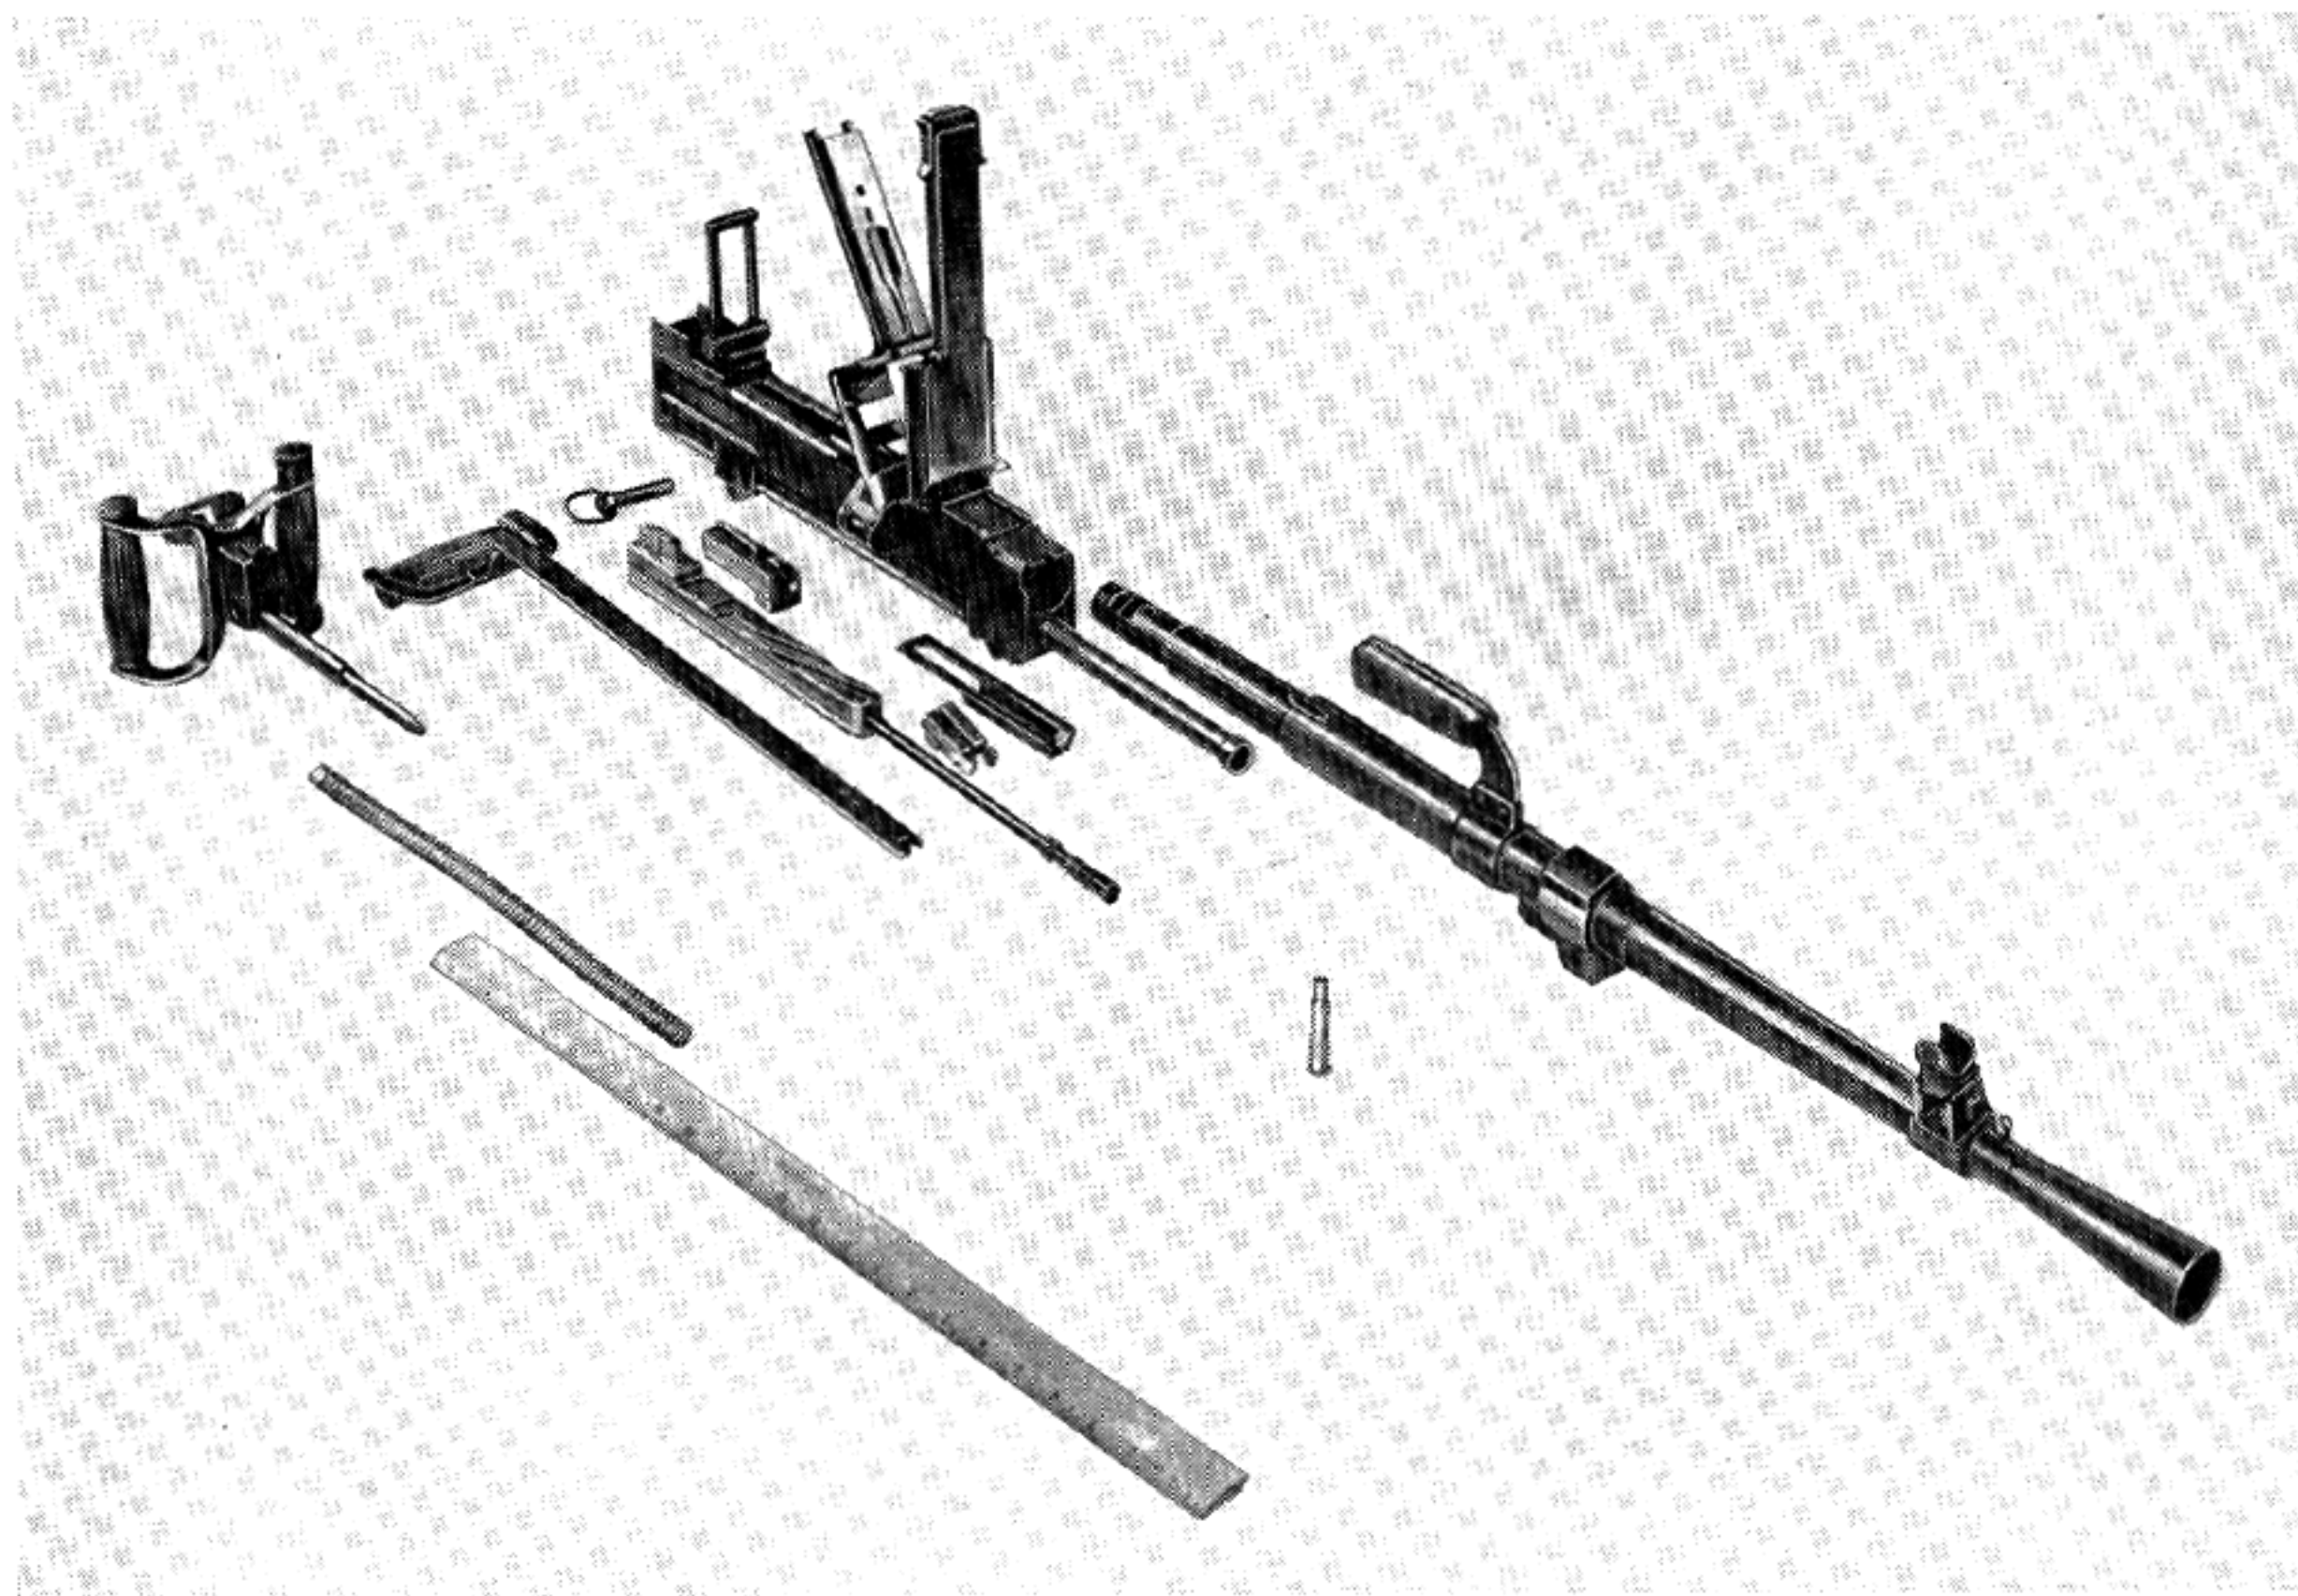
The SG-43 field stripped. The parts of the two-stage feed may be seen near the front end of the receiver. The belt feed pawls are still on the gun.
